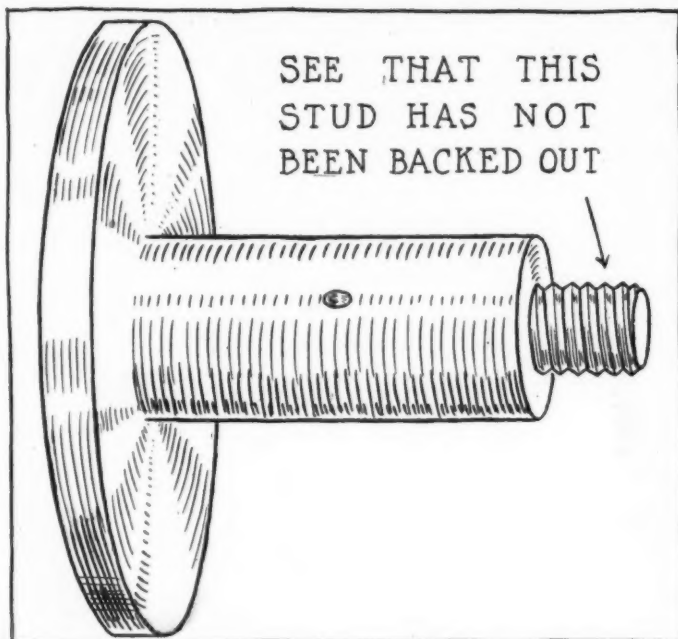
Stud in flywheel end of E-M-F crankshaft which should be kept tight
